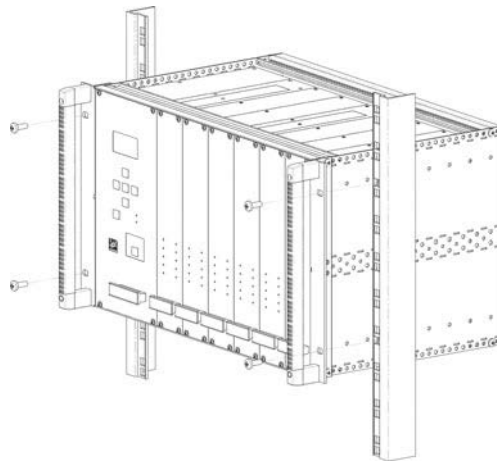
Assembling a DT-900 in a Rack Cabinet.
